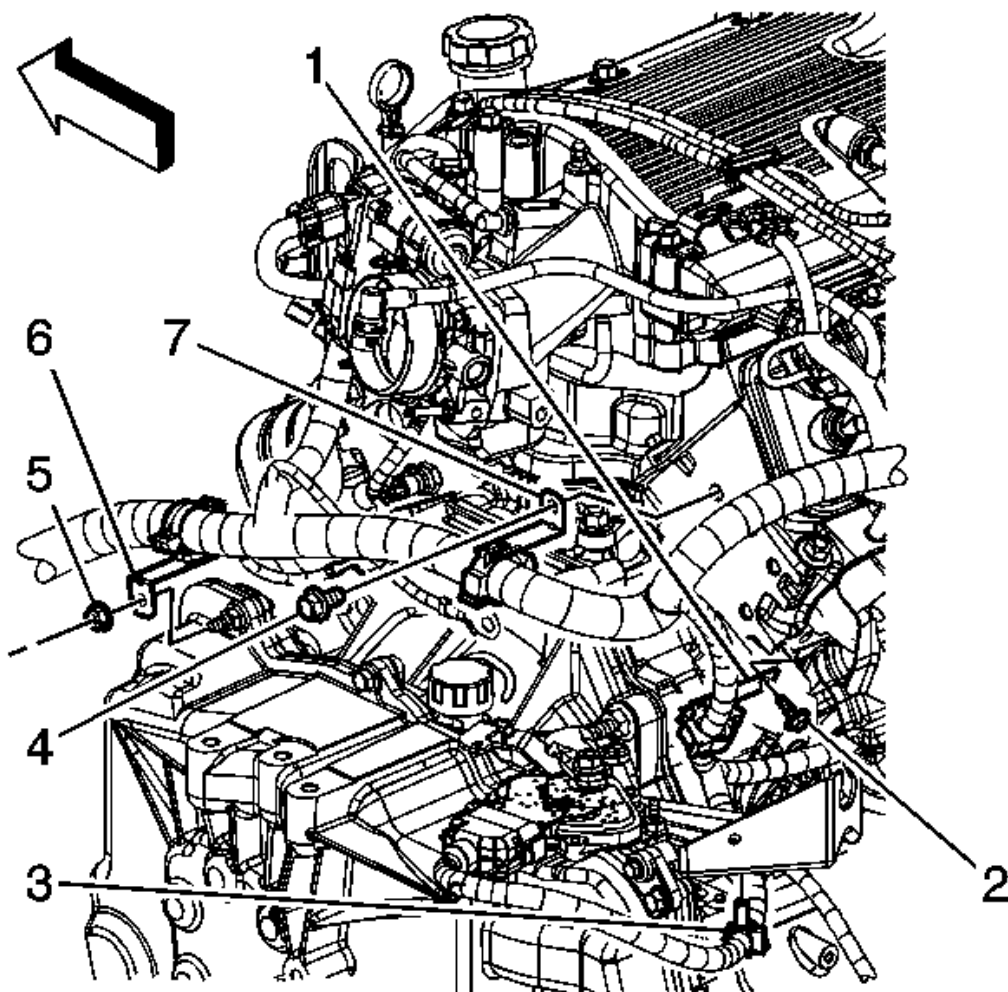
Identifying Engine Wiring Harness Clip & Nut (at Transaxle Stud)
